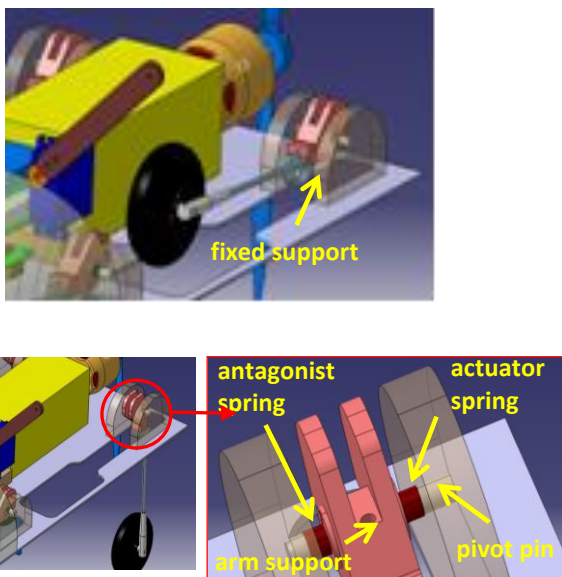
Hinge connection of the leg to the fuselage supporting structure
